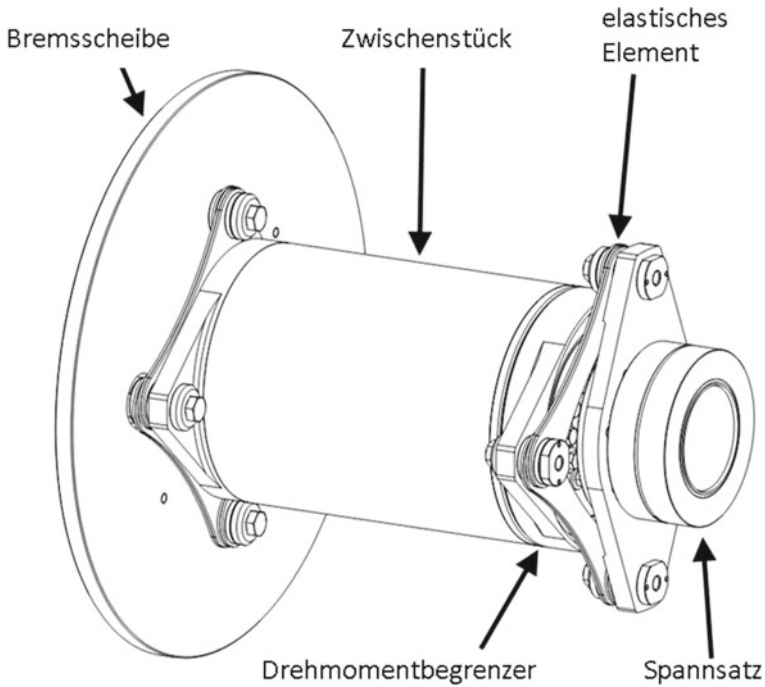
Coupling [KTR Kupplungstechnik GmbH]
